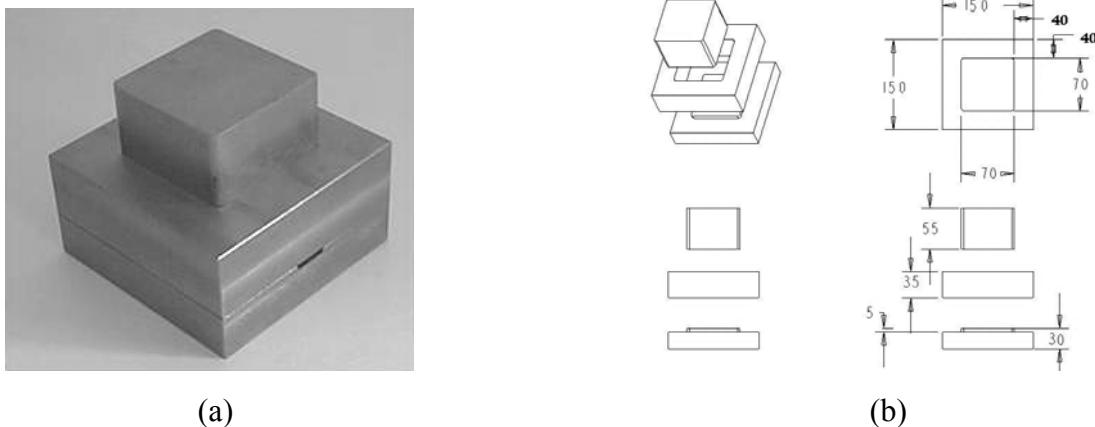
(a) Compaction die (b) technical drawing (dimensions are in millimeters).
